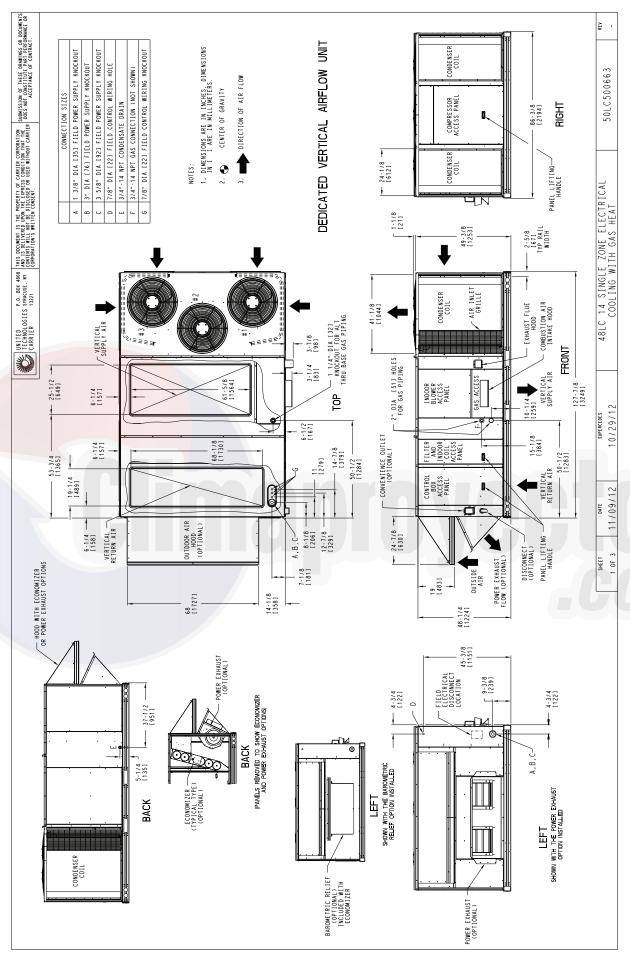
Unit Dimensional Drawing – 14 Size Unit, Sheet 1 of 3
